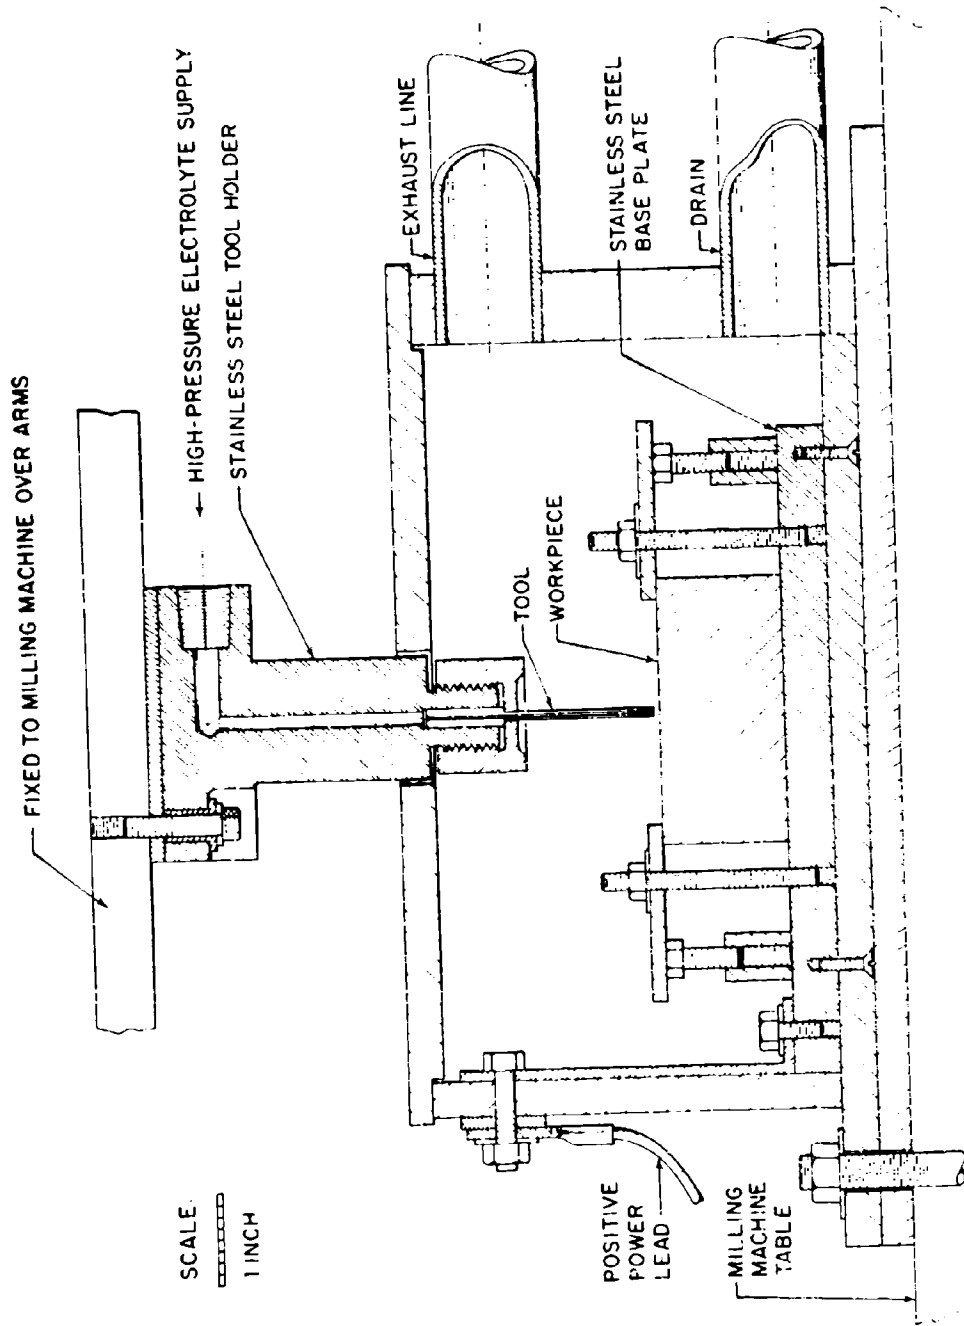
ELECTRO-CHEMICAL MACHINE TOOLING FOR MACHINING AT ATMOSPHERIC EXIT PRESSURE WITHOUT PRESSURE CHAMBER
